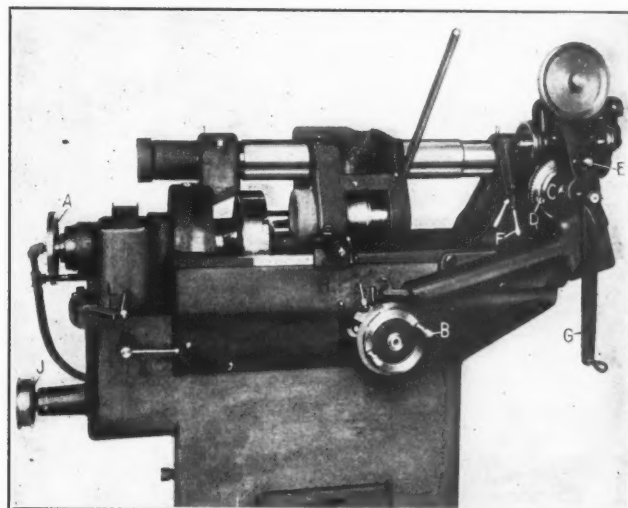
Two-spindle Machine with Wheel-slide set for Face-grinding
